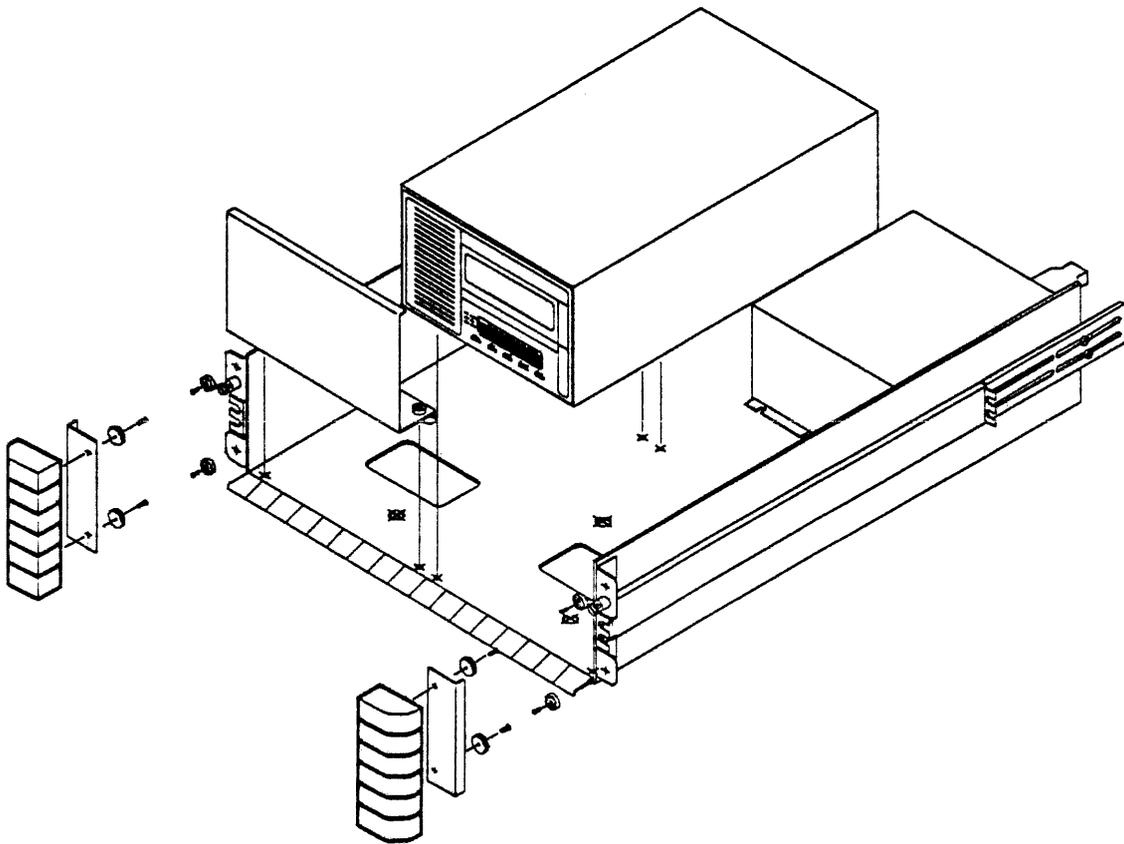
SI2480 Drive Chassis Removal and Replacement
